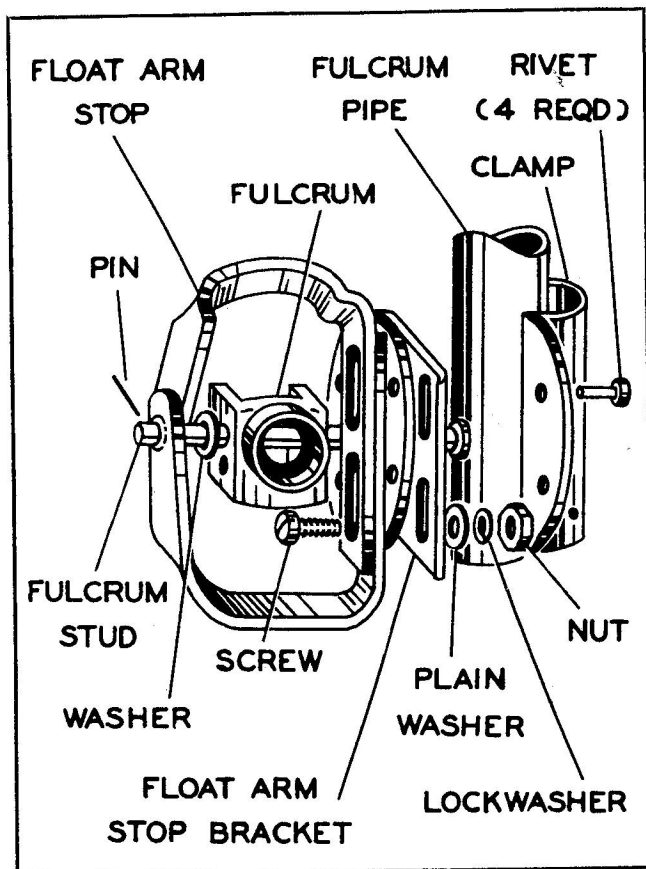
Assembling Fulcrum and Float Arm Stop in Tank Units of Outside Operating Rod Type
